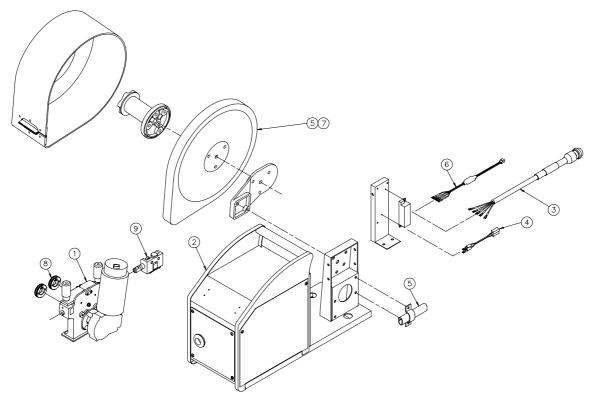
Exploded diagram of wire feeding unit (AFUF-4201)
